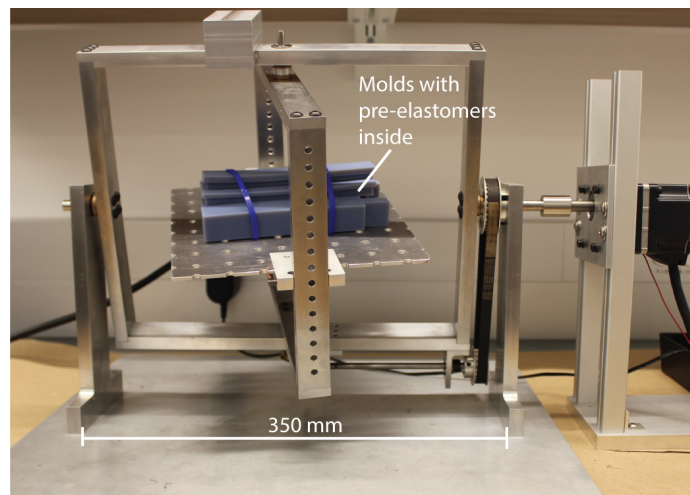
Custom-built rotational casting machine with multiple molds. Viscous pre-elastomers inside the mold flow against the internal walls coating them and forming a seamless actuator.
